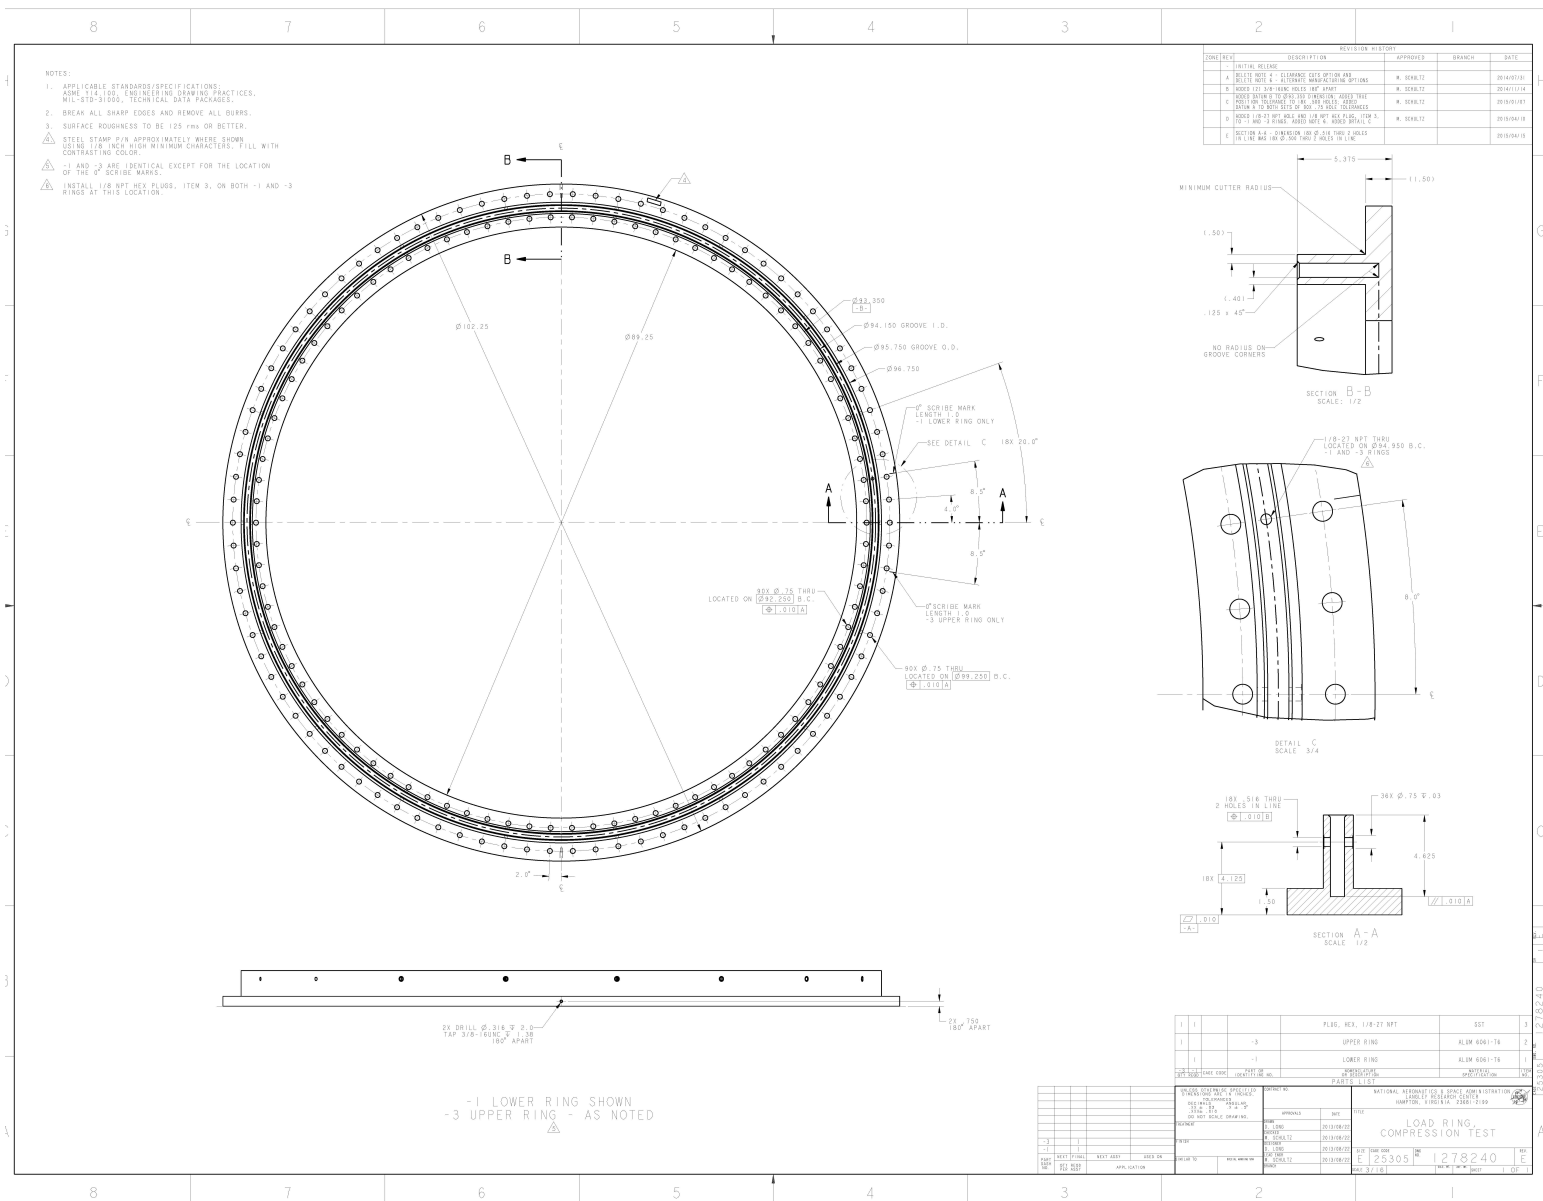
Cylindrical Test Article Aluminum Attachment Ring Design, LaRC Drawing 1278240 Rev. E.
